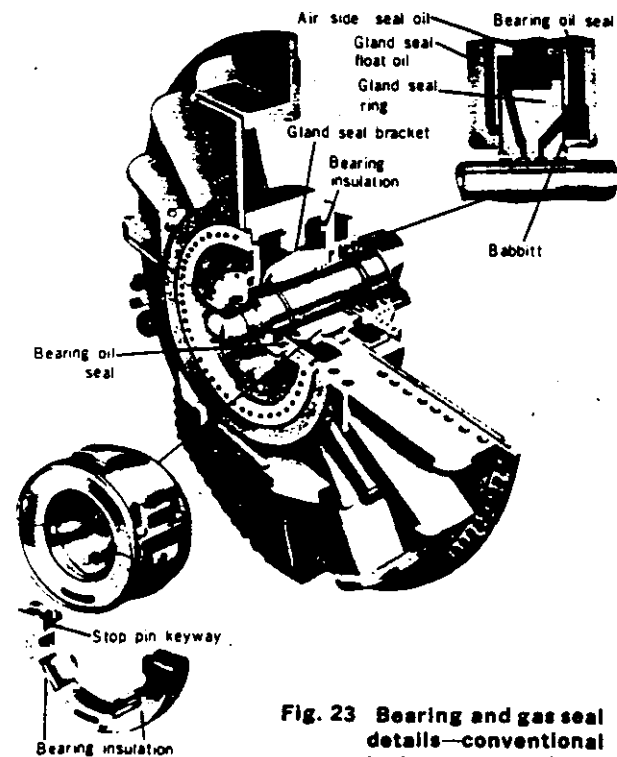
Bearing and gas seal details—conventional hydrogen cooled
